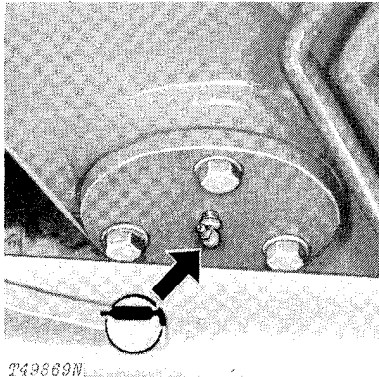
Lower Cluster Gear Shaft Bearing (1 Point)
